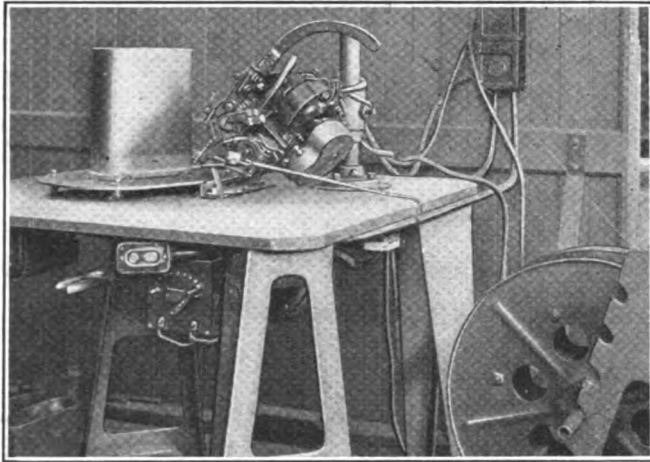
AUTOMATIC WELDER ATTACHING TANK BOTTOMS
